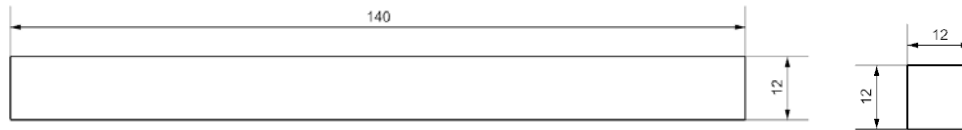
Compression test specimen for ASTM D6641 [48].
